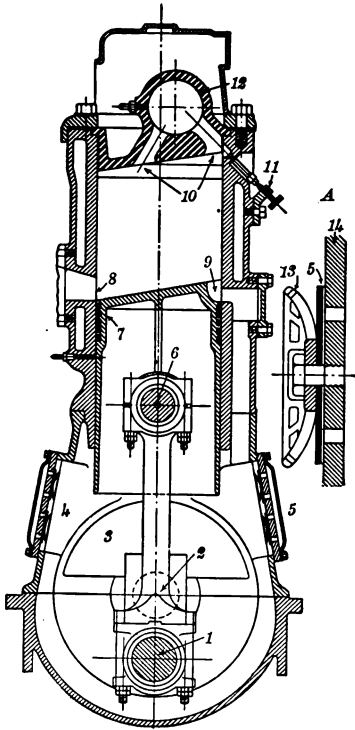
SECTION OF BOLINDER OIL ENGINE
